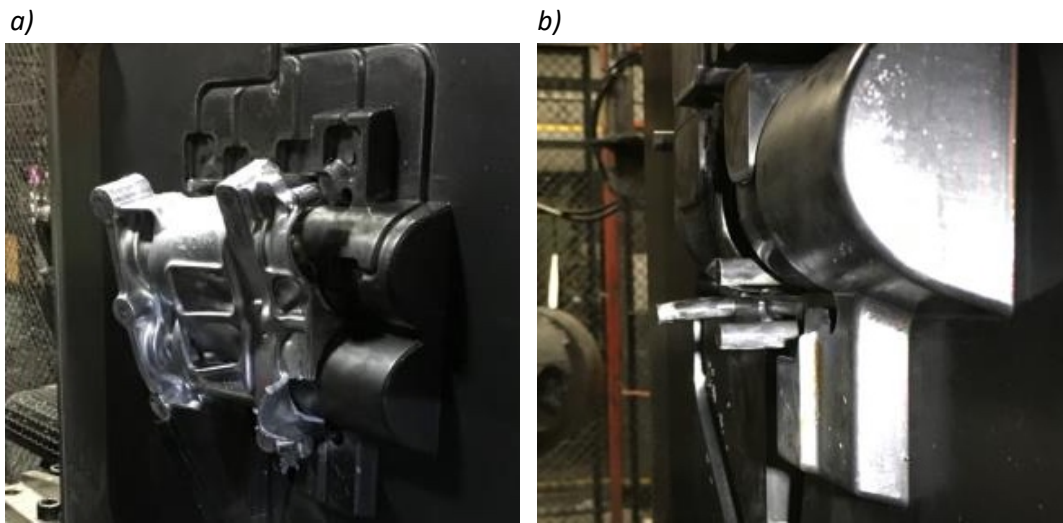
Photographs of the stuck casting and bent pin in the AlCrN coated die
